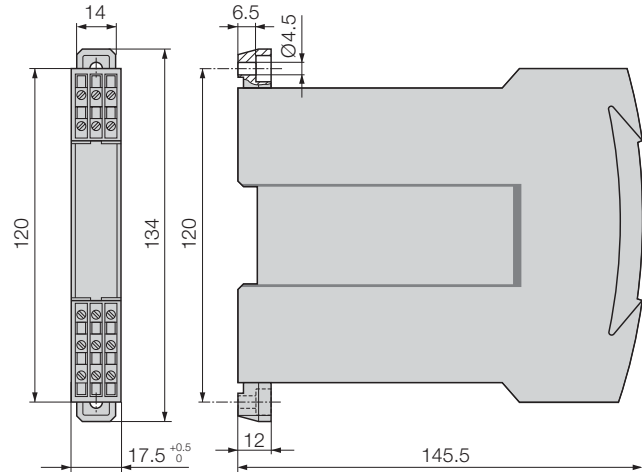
SINEAX TV 808 in housing S17, screw hole mounting brackets pulled out.
